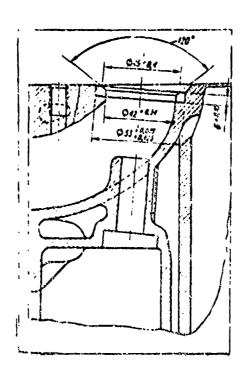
Replaceable intake valve seat, installed in cylinder block
